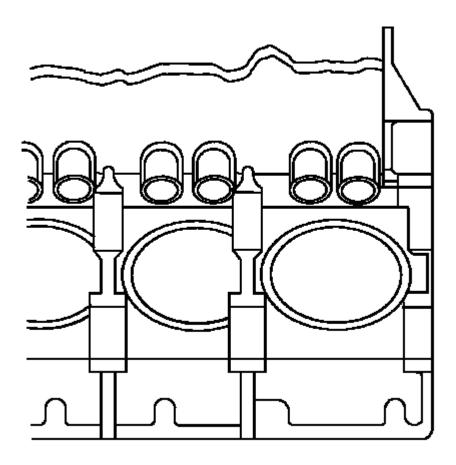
Cleaning Engine Block Courtesy of GENERAL MOTORS CORP.
